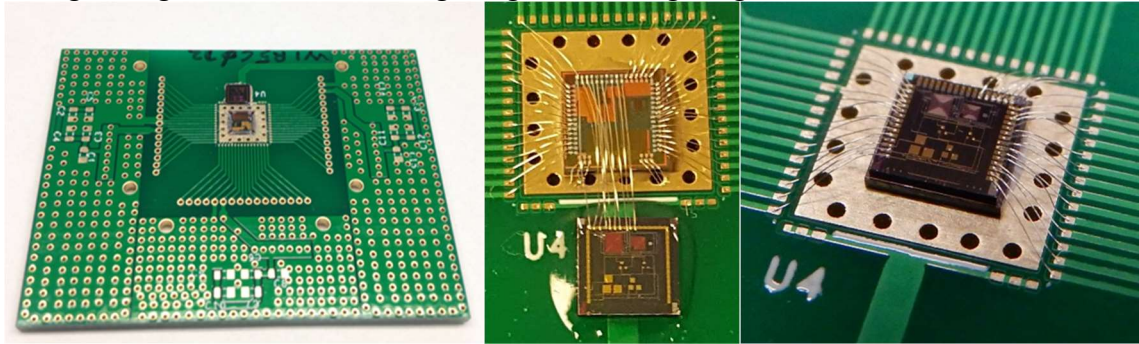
Chip-level OPLL on PCB “daughter board.”(Left) Chips mounted “side-by-side” on daughterboard. (Middle) Close-up photograph of photonics chip and electronics chip wirebonded in a “side-by-side” configuration for system testing. (Right) Single chip integration of photonic and electronic chips for “integrated OPLL testing.
